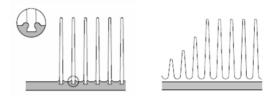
Types of fin attachment. Left: G-foot fins (grooved fins), right: extruded fins [Spiro-Gills (2012)]
